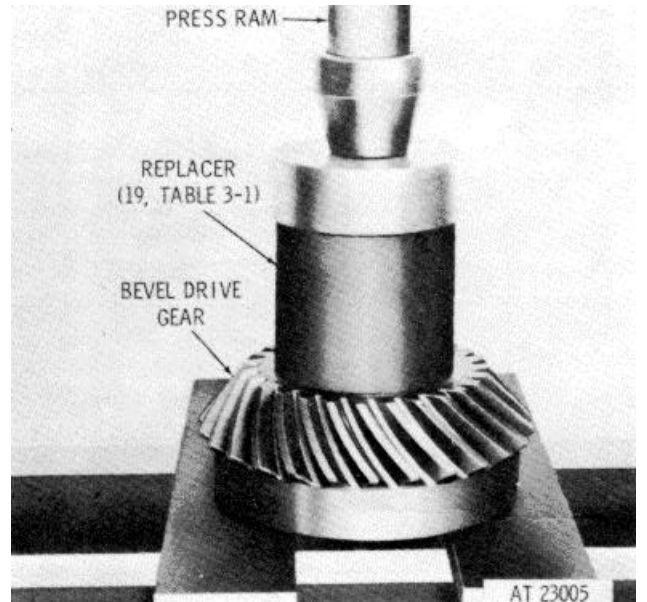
Installing rear bearing outer race into bevel drive gear
